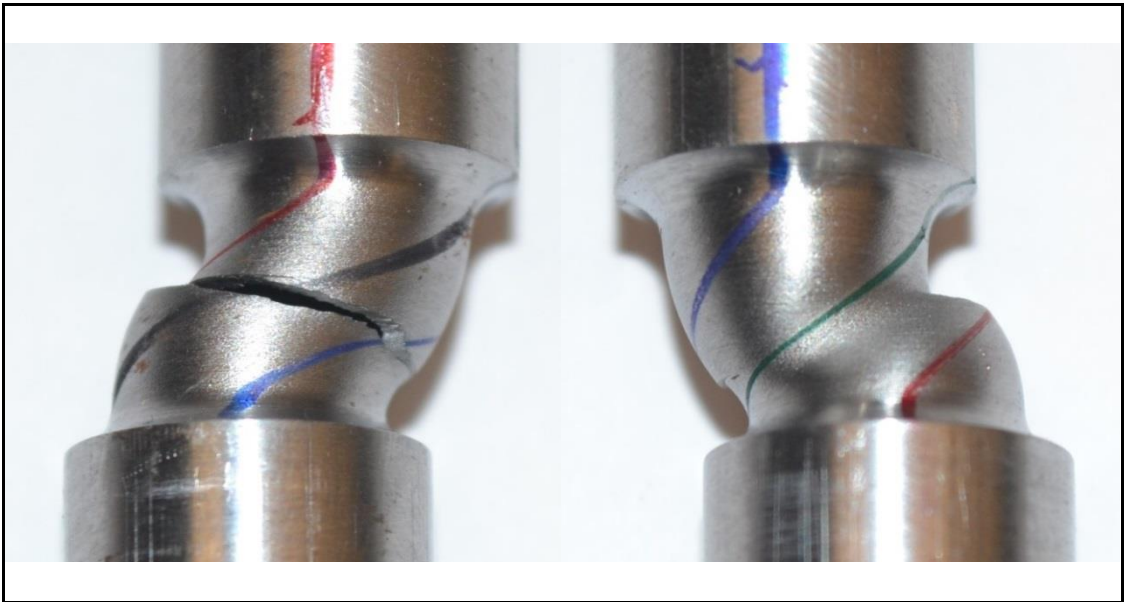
Torsion Specimen: Macro Views of Typical Failure Zone
